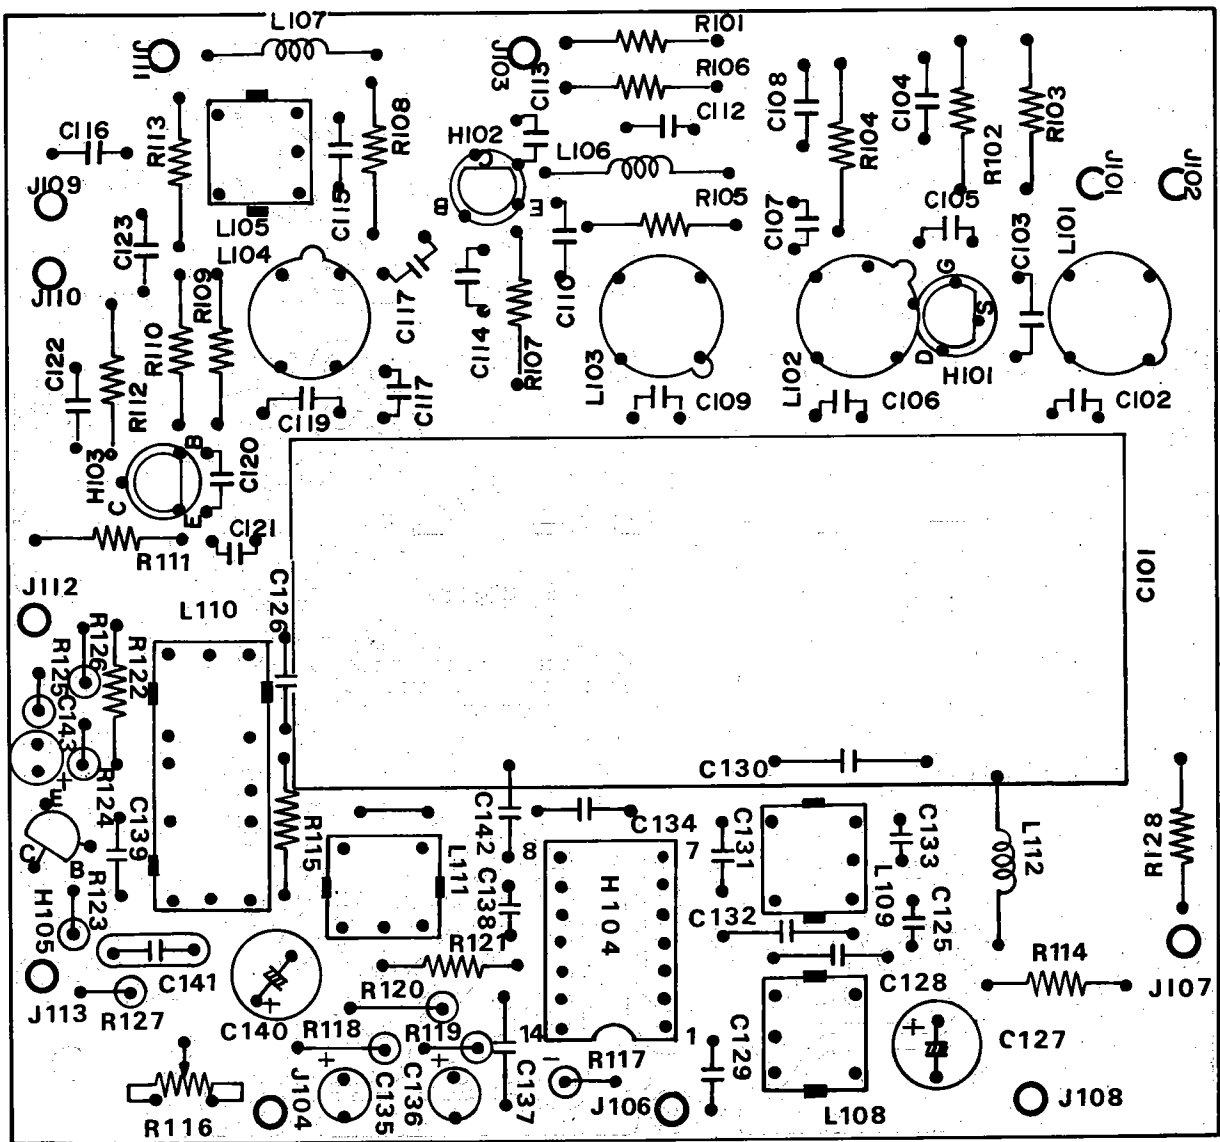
FM Front End and AM Tuner Assembly P100 Component Locations
